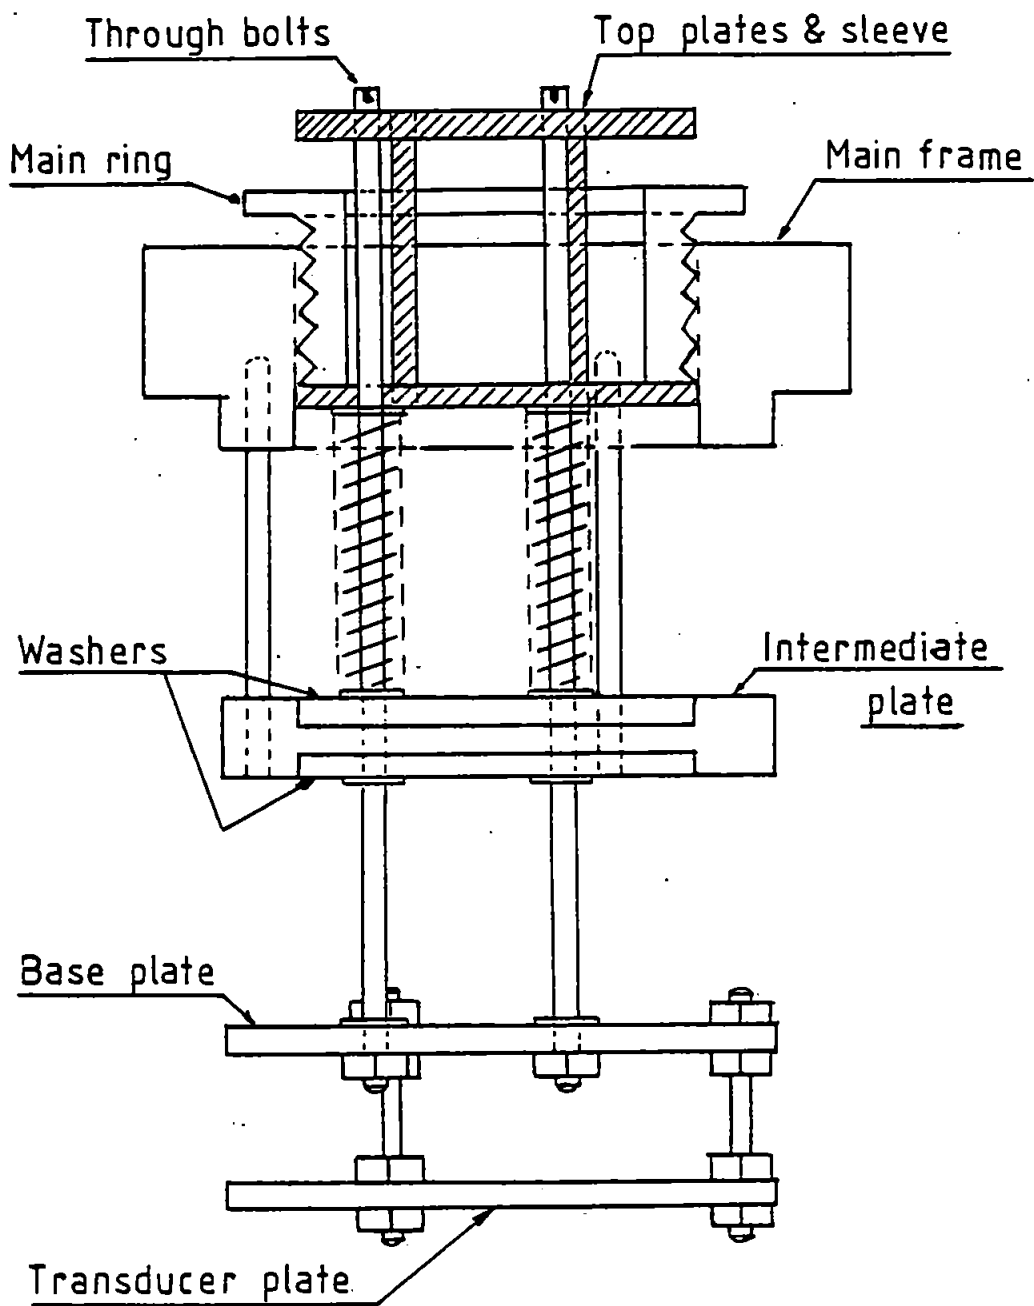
THE TRANSDUCER MOUNTING AND POSITIONING HEAD.
